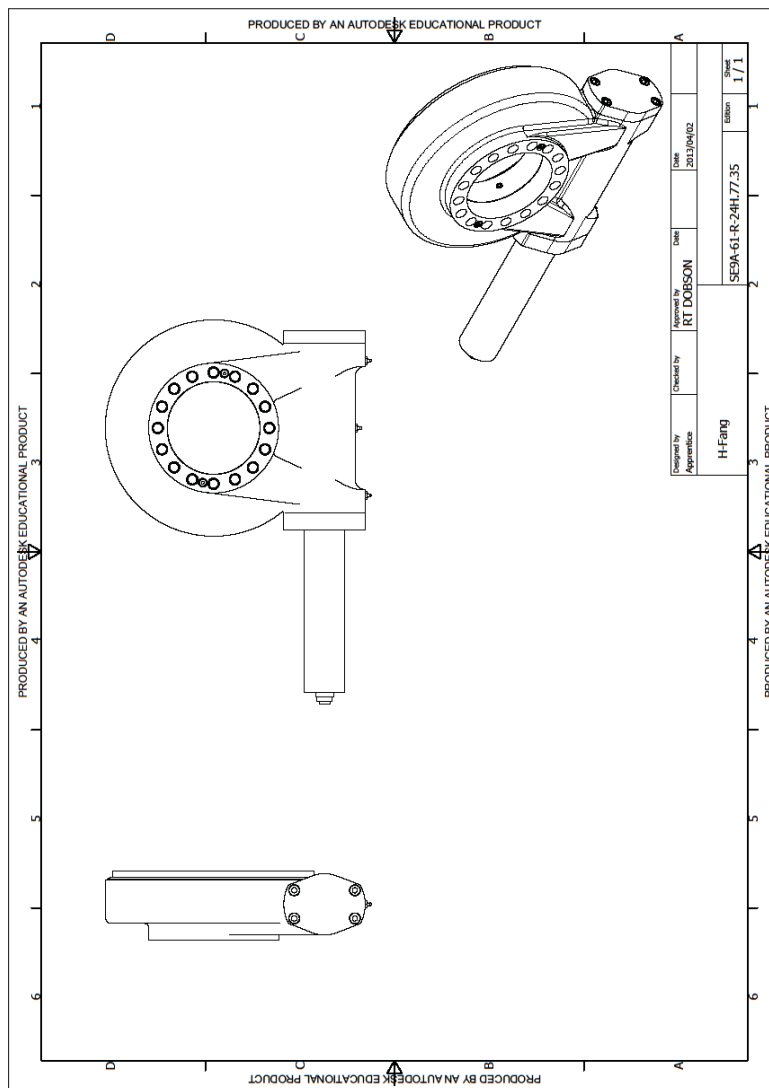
CAD drawing slewing drive selected for the mechatronic platform.
